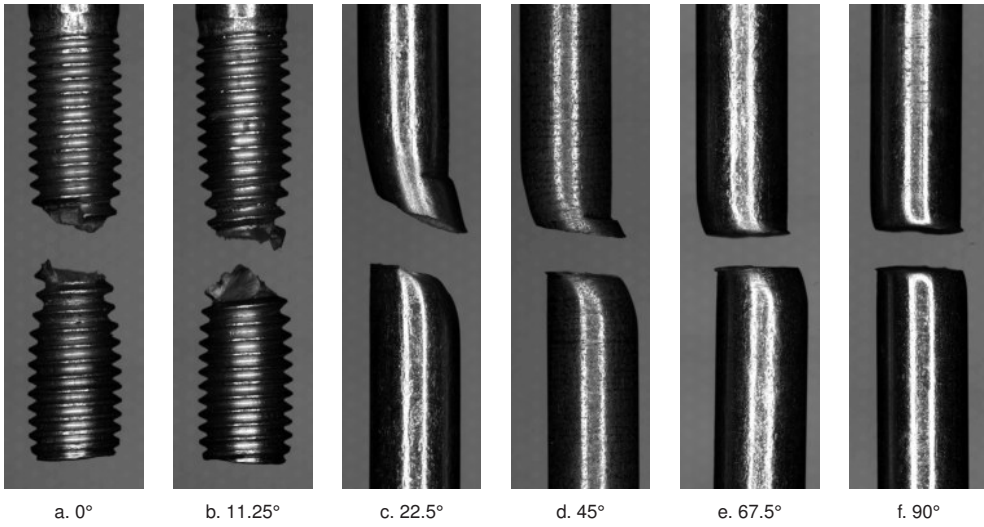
Fracture surfaces for bolts M12 4.8.
